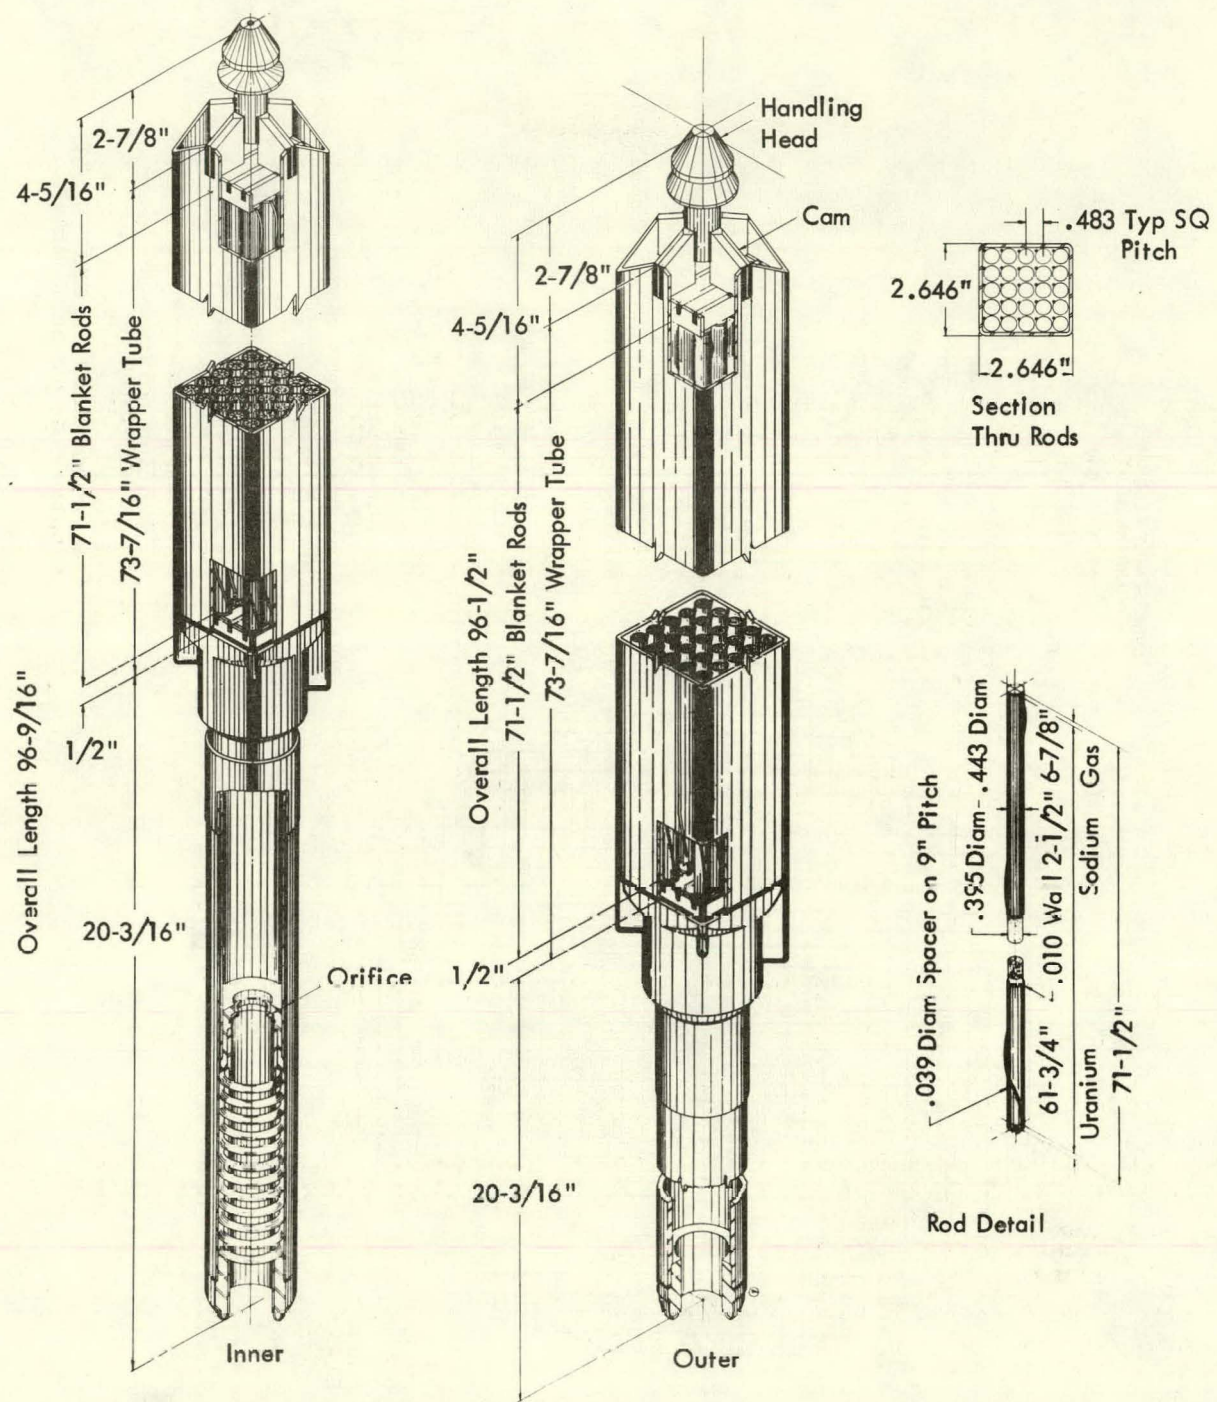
RADIAL BLANKET SUBASSEMBLY
